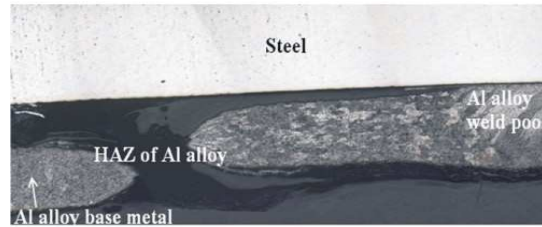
Fracture part in joint with 0.65 m min^{-1} of welding speed and 165 A of electrical current used
